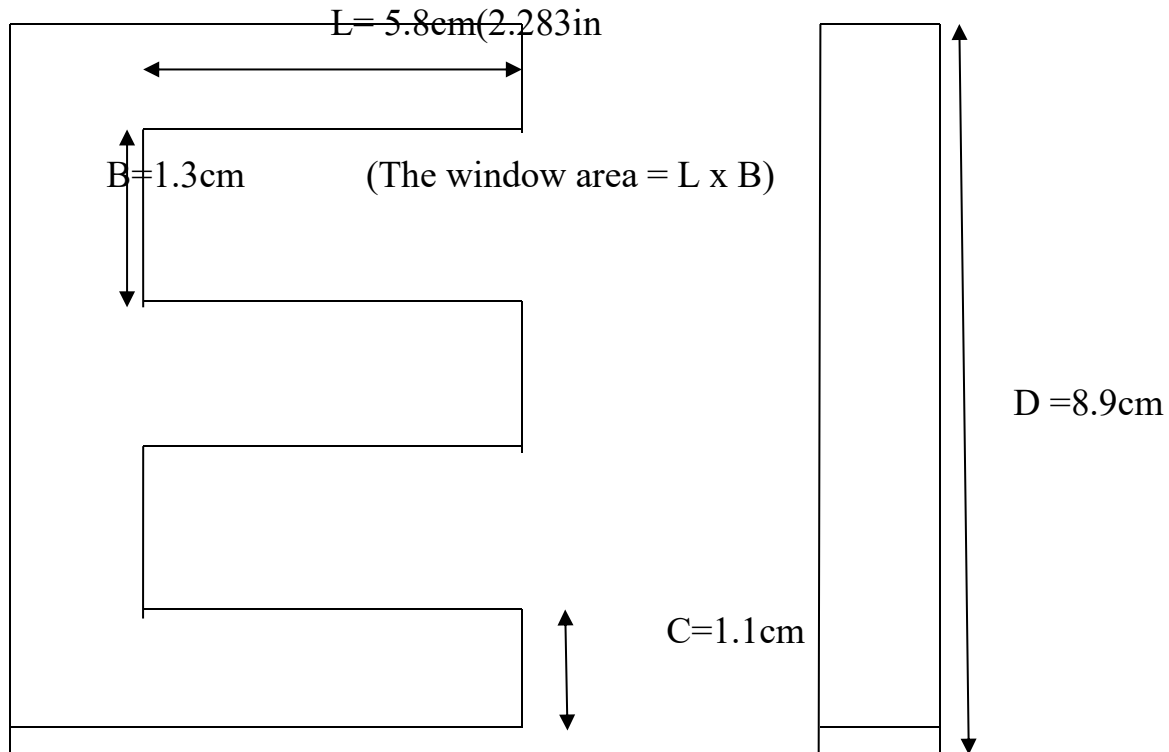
the dimensions of the transformer laminations (a) E-shaped (b) I-shaped
